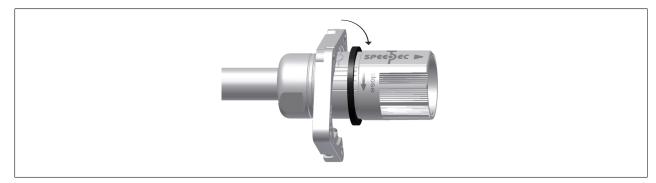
Attaching the metal flange to the connector (rear panel installation)
